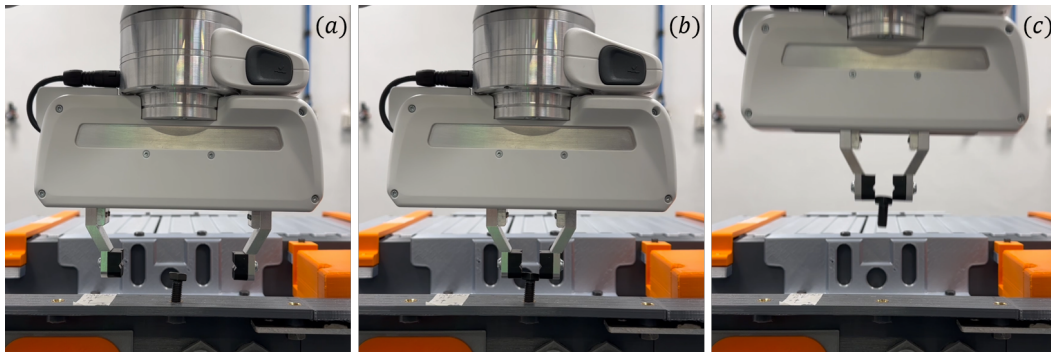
Detail of the lifting of the screw.(a) the gripper reaches the screw, (b) closes its finger, and (c) the robot lifts the screw up.
